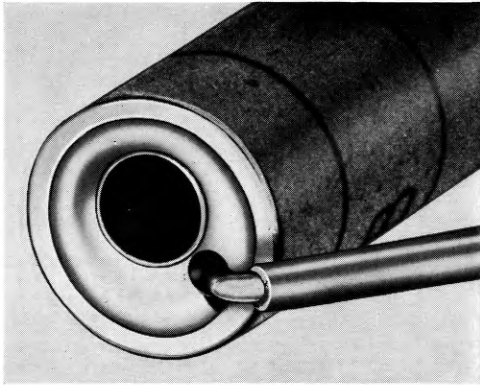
END OF SPINDLE OF WRAPPING TOOL
